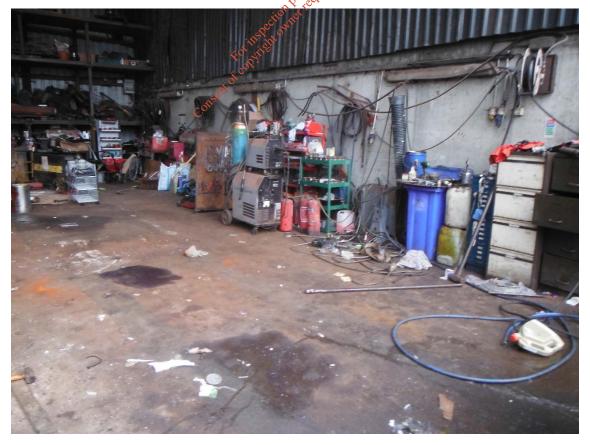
Workshop: Fire Extinguishers & Oxy Acetylene for Welding/Cutting
